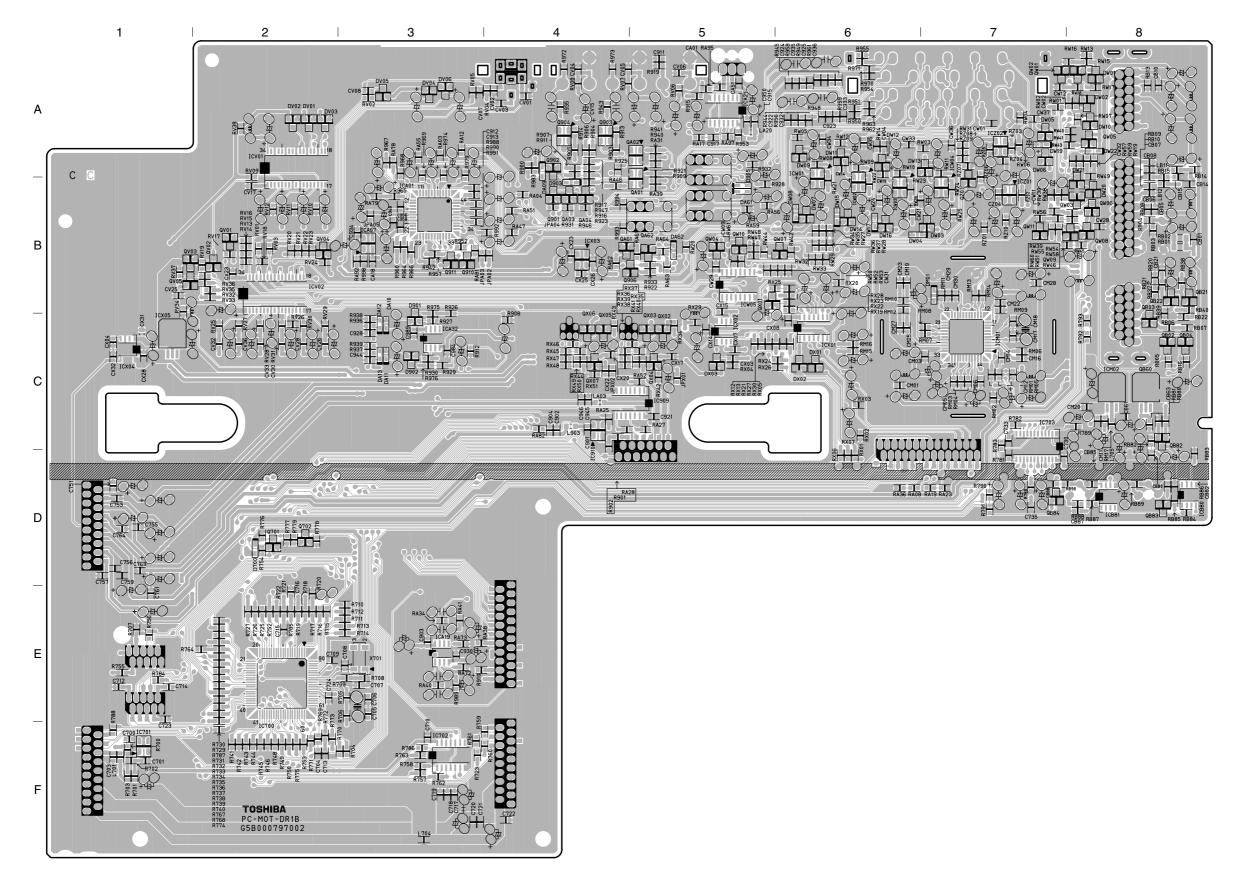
EU05 Mother PC Board (Bottom side)
